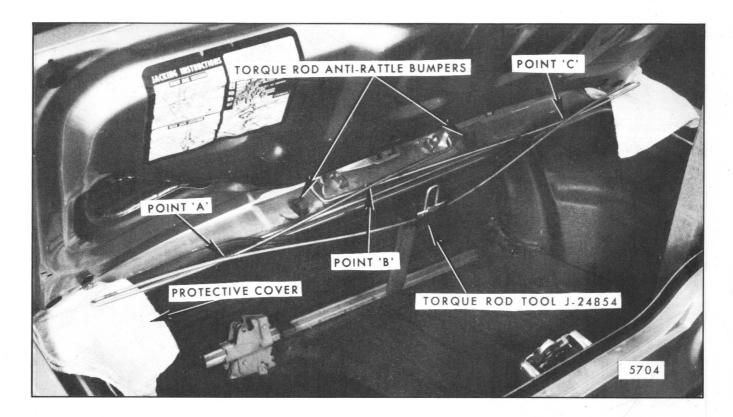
Rear Compartment Lid Removal Shown with Torque Rod Relieved - "11" Styles
